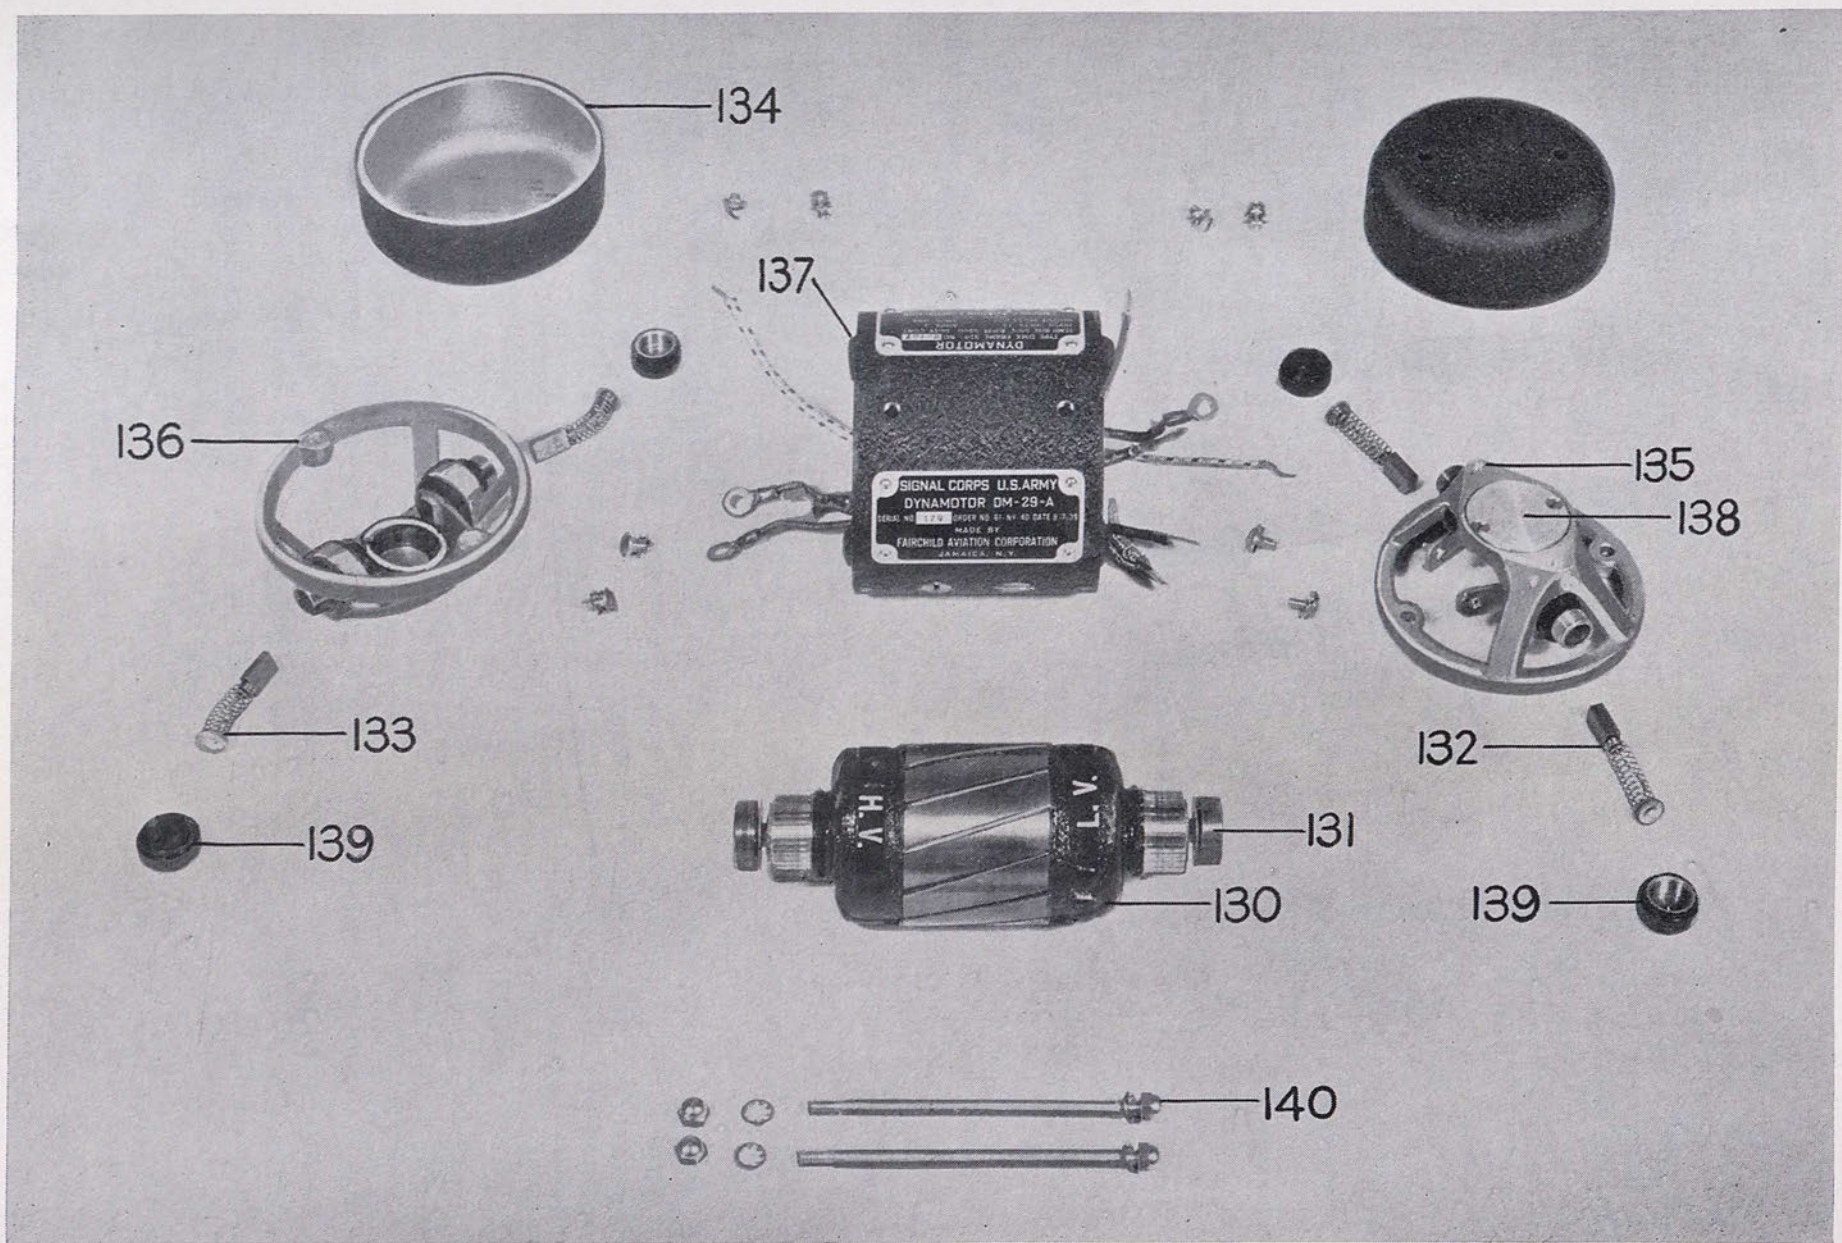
DYNAMOTOR DM-29-A, SHOWING COMPONENTS
